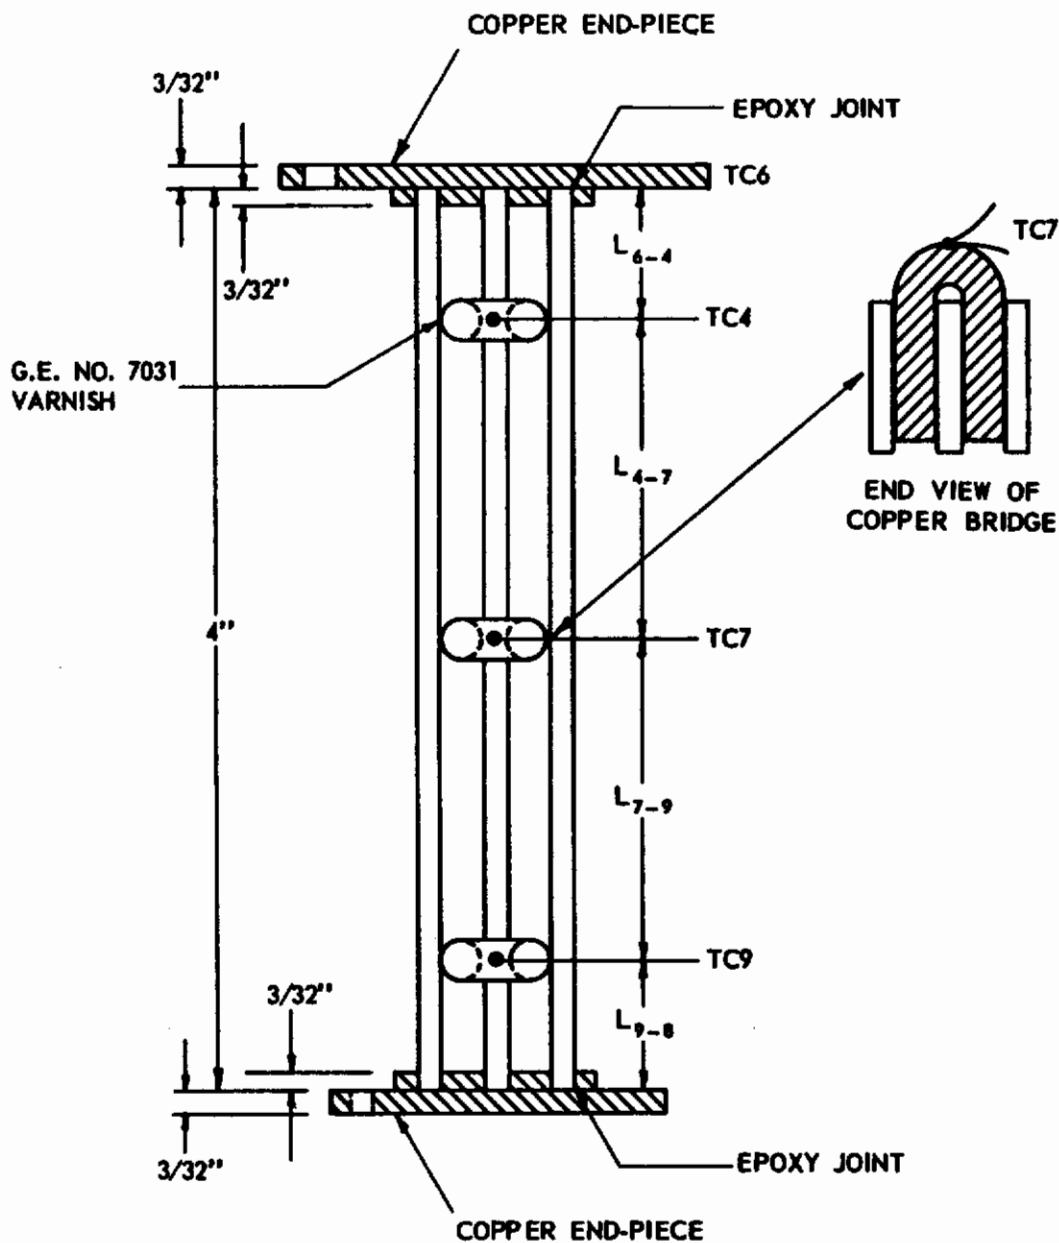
DETAILED SKETCH OF SPECIMEN ASSEMBLY SHOWING ATTACHMENT OF THERMOCOUPLES
